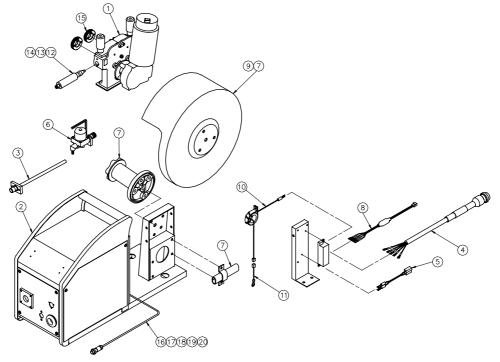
Exploded diagram of wire feeding unit (AFF-4001)
